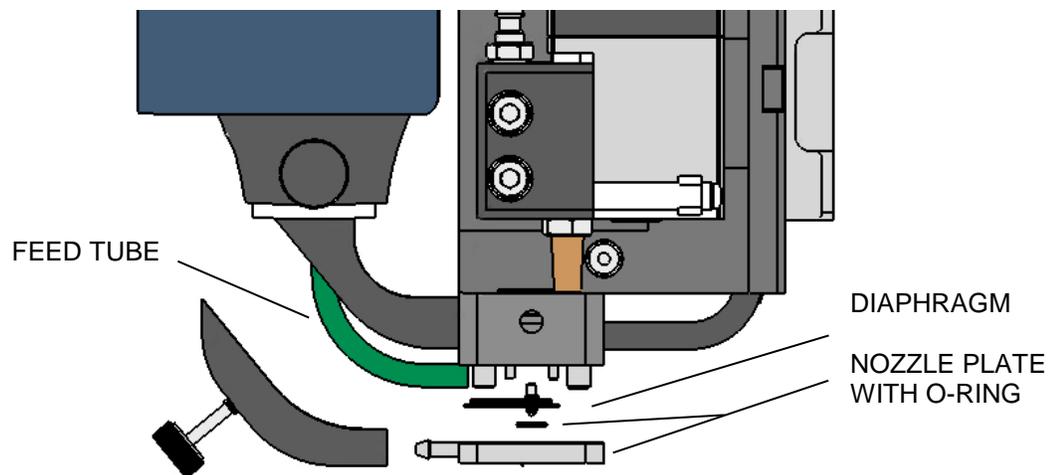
HM-2600 Feed Tube, Diaphragm, and Nozzle Plate with O-Ring
